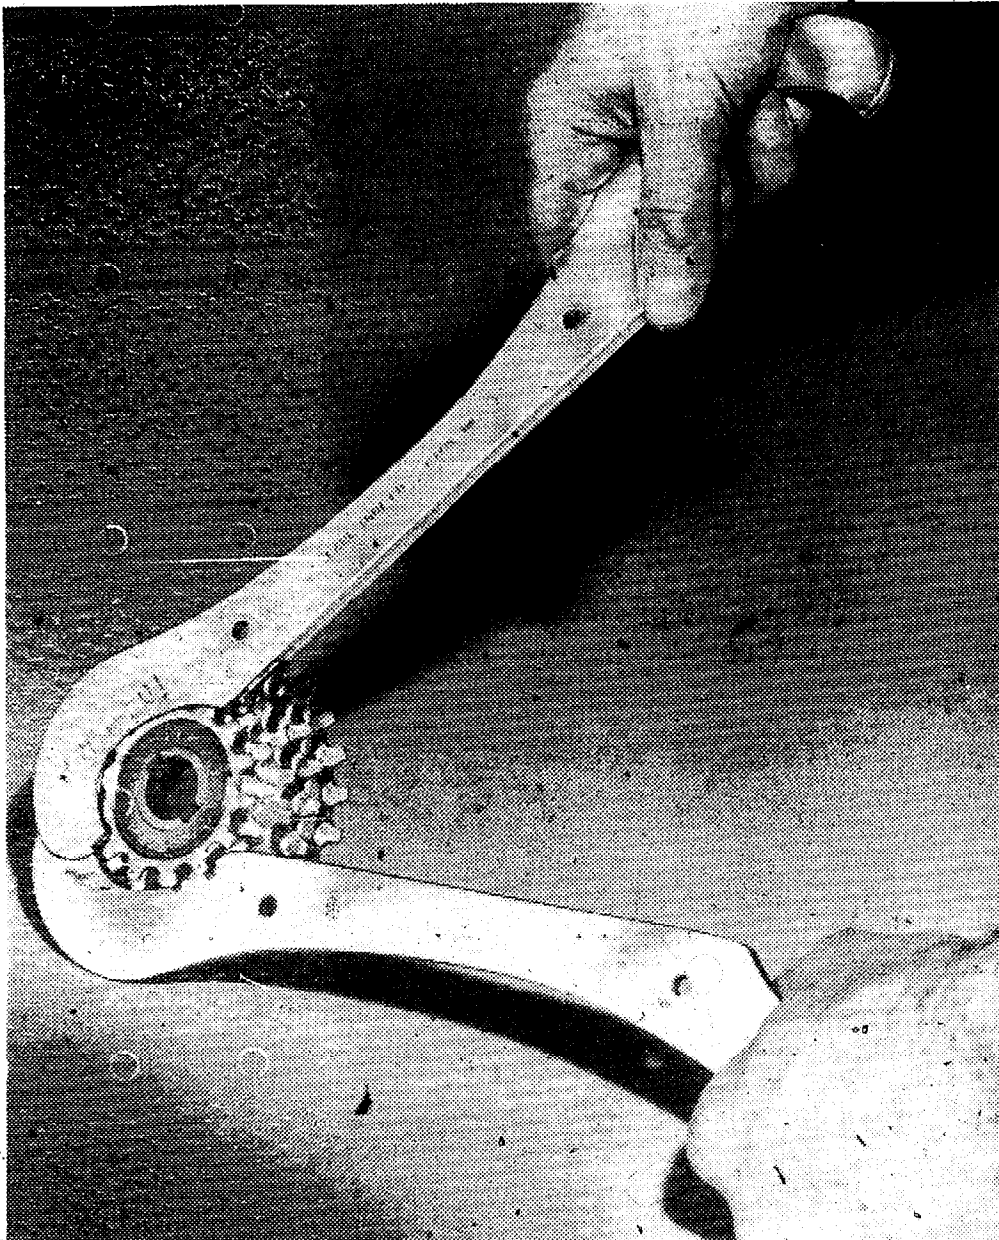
This Park sprocket tool is used to remove sprockets from flywheels.
